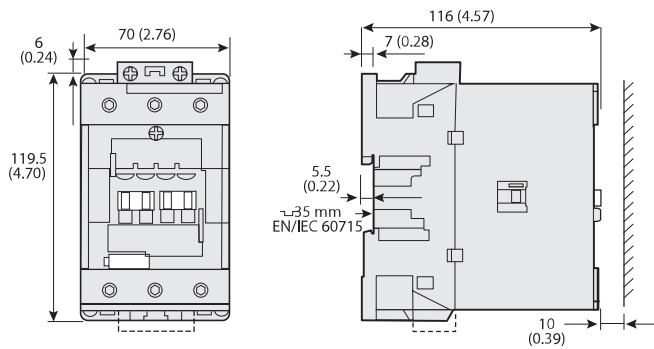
100-E80...100-E96 3-Pole Contactors with Side-mounted Auxiliary Contact
